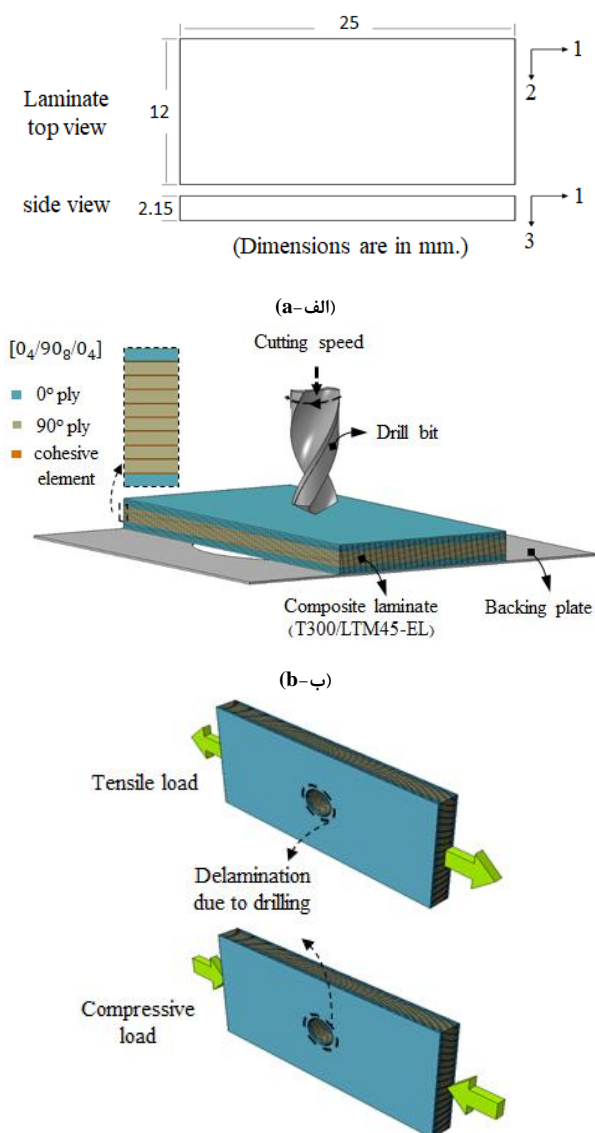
Geometric specifications and loading of composite laminate. a) Drilling, b) Loading
